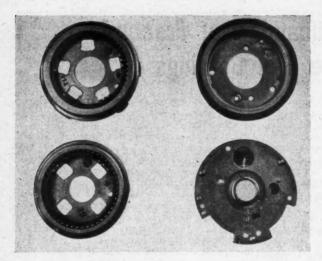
Examples of Dyna-Flyte replacement distributor plates for motor vehicles. Each incorporates a split-race thinsection ball bearing
